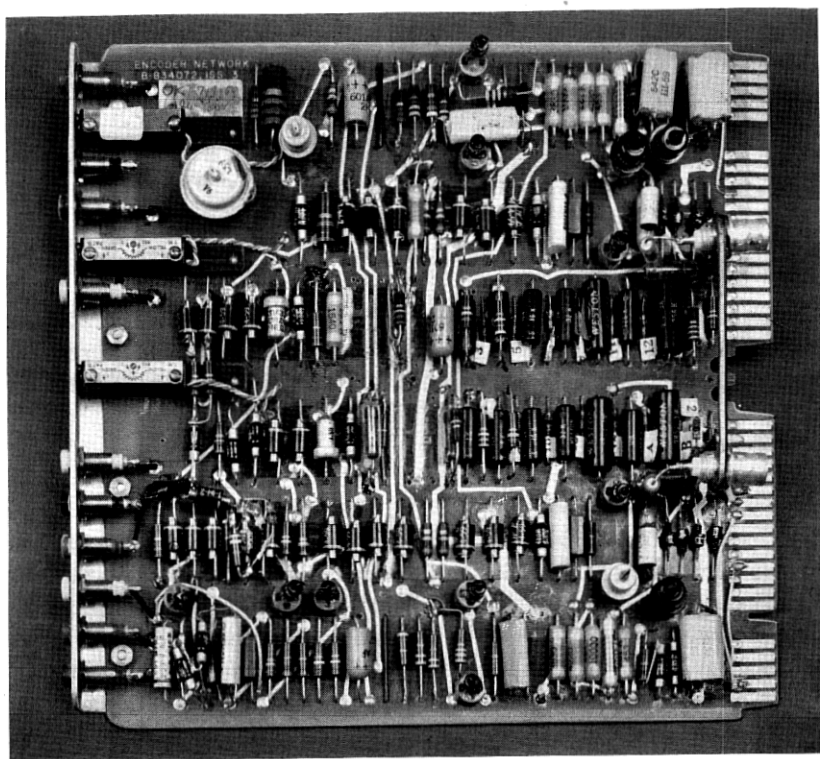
Plug-in type printed board used in experimental PCM system.
